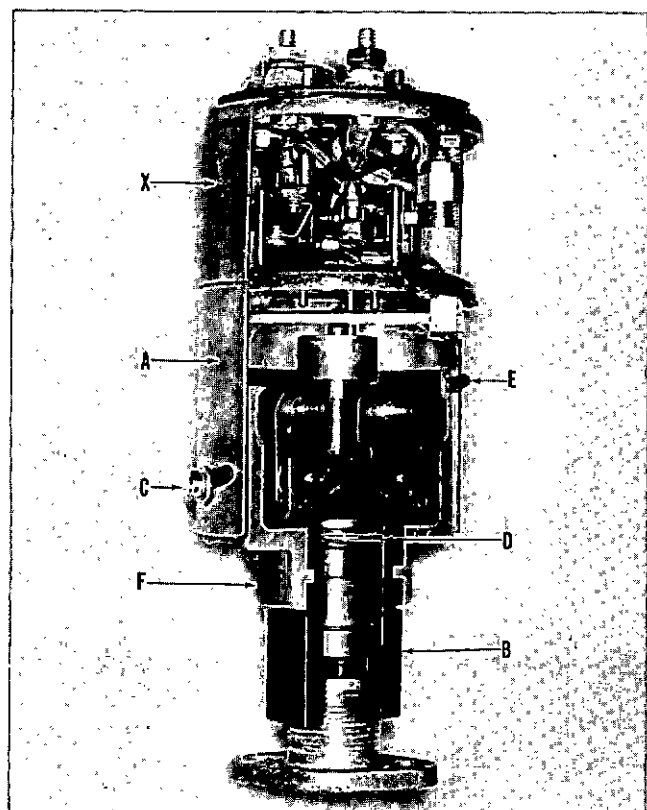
, CGS72. Synchro-Start switch — Cutaway
